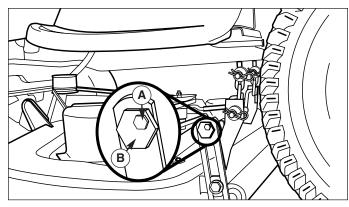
Leveling The Mower Side-to-Side A. Outside Nut
